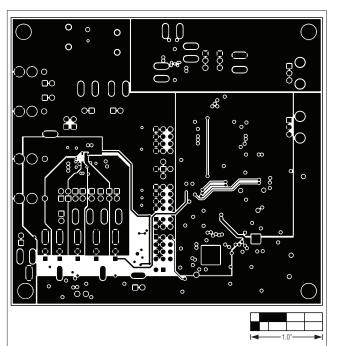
MAX9880A EV Kit PCB Layout—Layer 4
